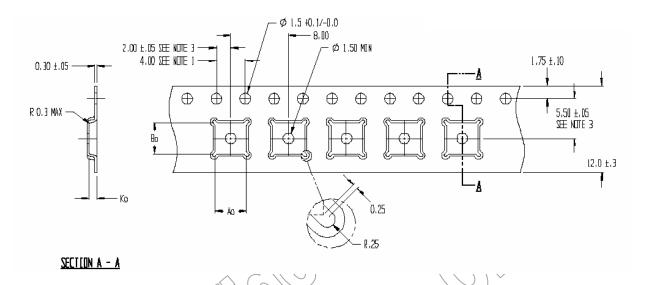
QN8007B/8007BL Carrier Tape Dimensions
